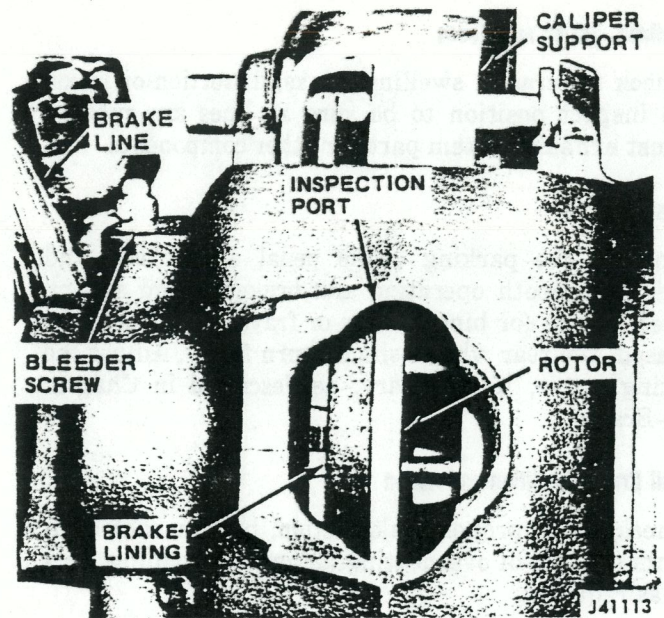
Caliper Inspection Port—Cherokee-Wagoneer-Truck Models
